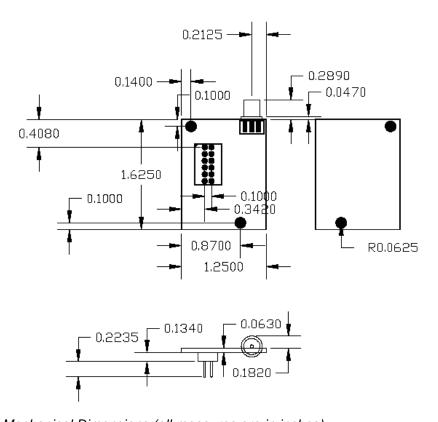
Mechanical Dimensions (all measures are in inches)
